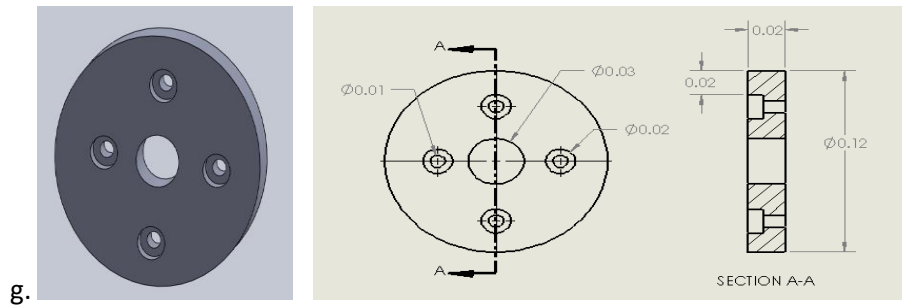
12 g) baseplate 3D and 2D with section view drawing
